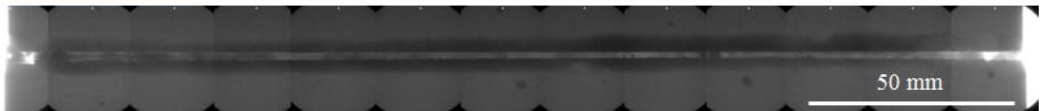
RT result of weld bead having 3mm gap and filled with slag pieces - 2
